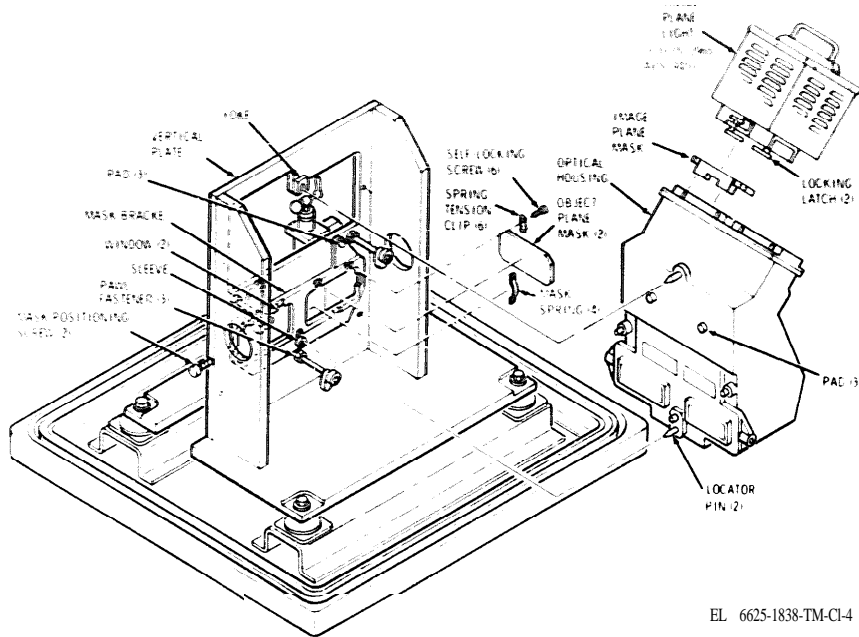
Installation of RO-352/APS-94D optical housing on Test Fixture. Optical Alignment TS-2966/APS-94D
